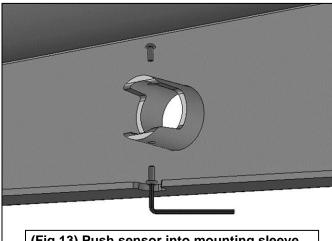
Push sensor into mounting sleeve. Use 4mm Screws to lock sensor in place.
